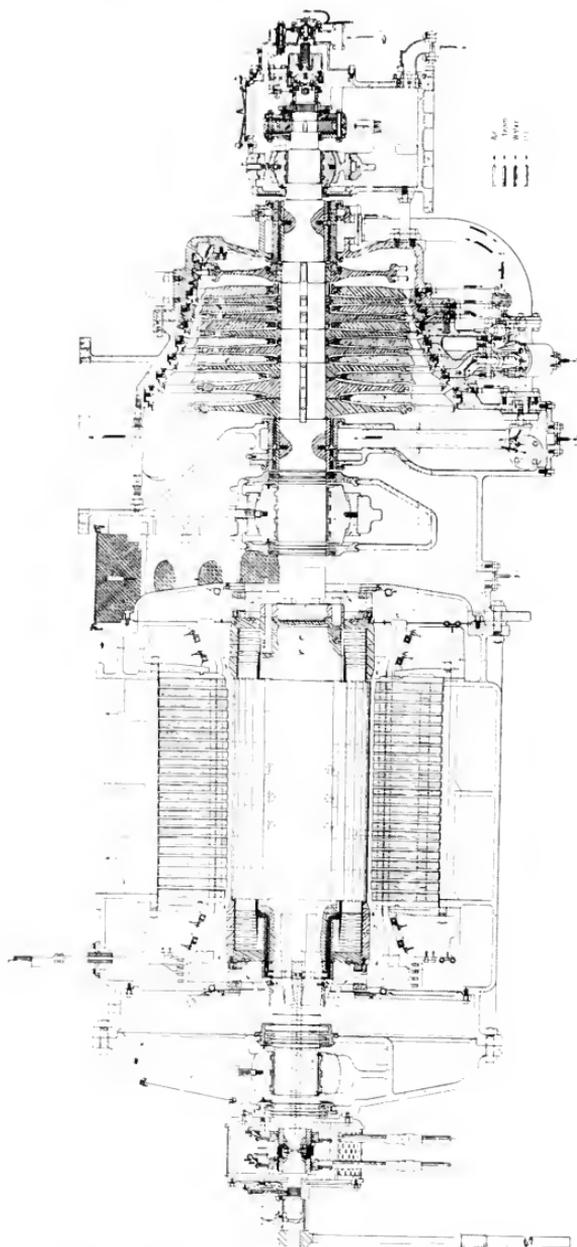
Sectional View of Alternating-current Generator in which End Bearing is Carried by End Shield
